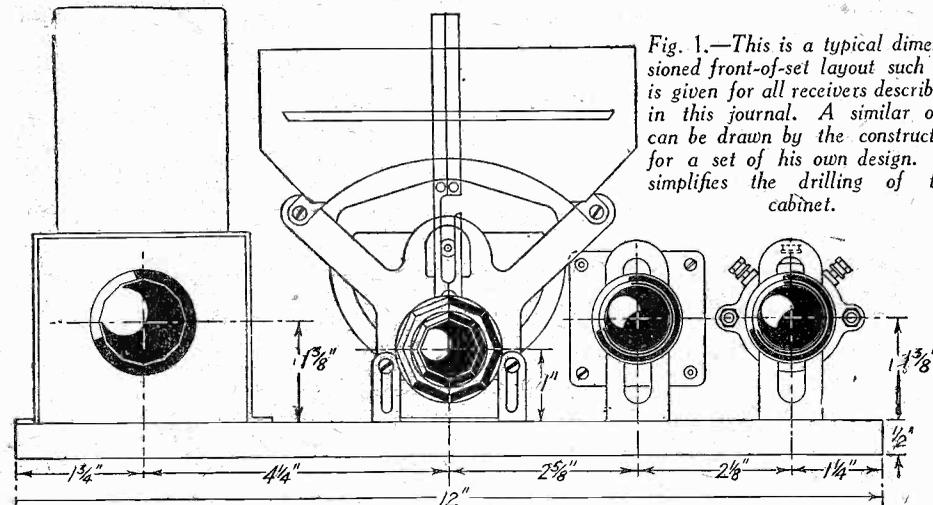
This is a typical dimensioned front-of-set layout such as is given for all receivers described in this journal. A similar one can be drawn by the constructor for a set of his own design. It simplifies the drilling of the cabinet.
